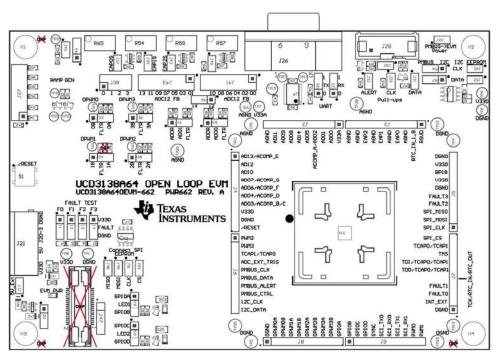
UCD3138A64OEVM-662 Top Layer Assembly Drawing (Top view)
